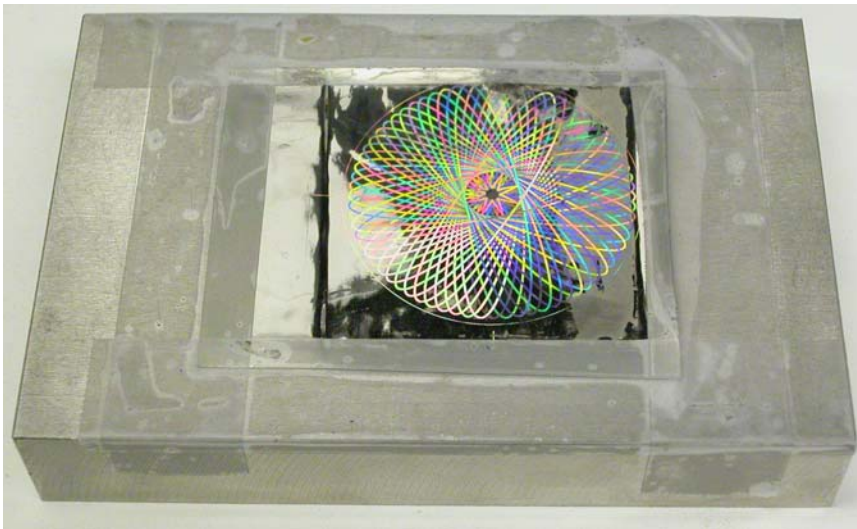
Die E4, used for evaluating hologram embossing with the uniform pressure actuator.
